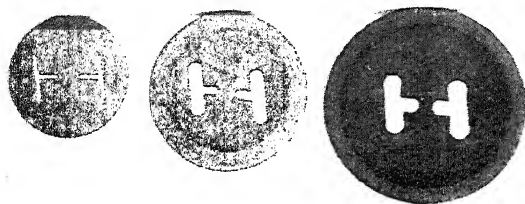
EXTRUSION DIE, DIE HOLDER, AND BOLSTER
